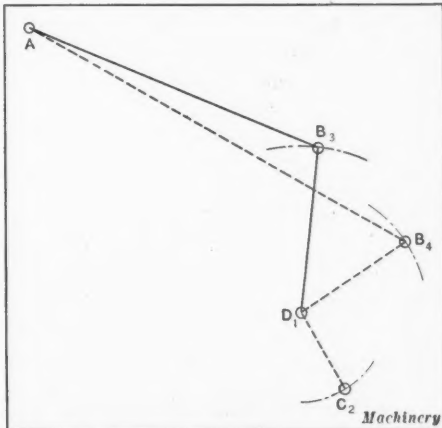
Position of Air Cylinders, Pistons and Bellcranks after Operation on Improved Machine
